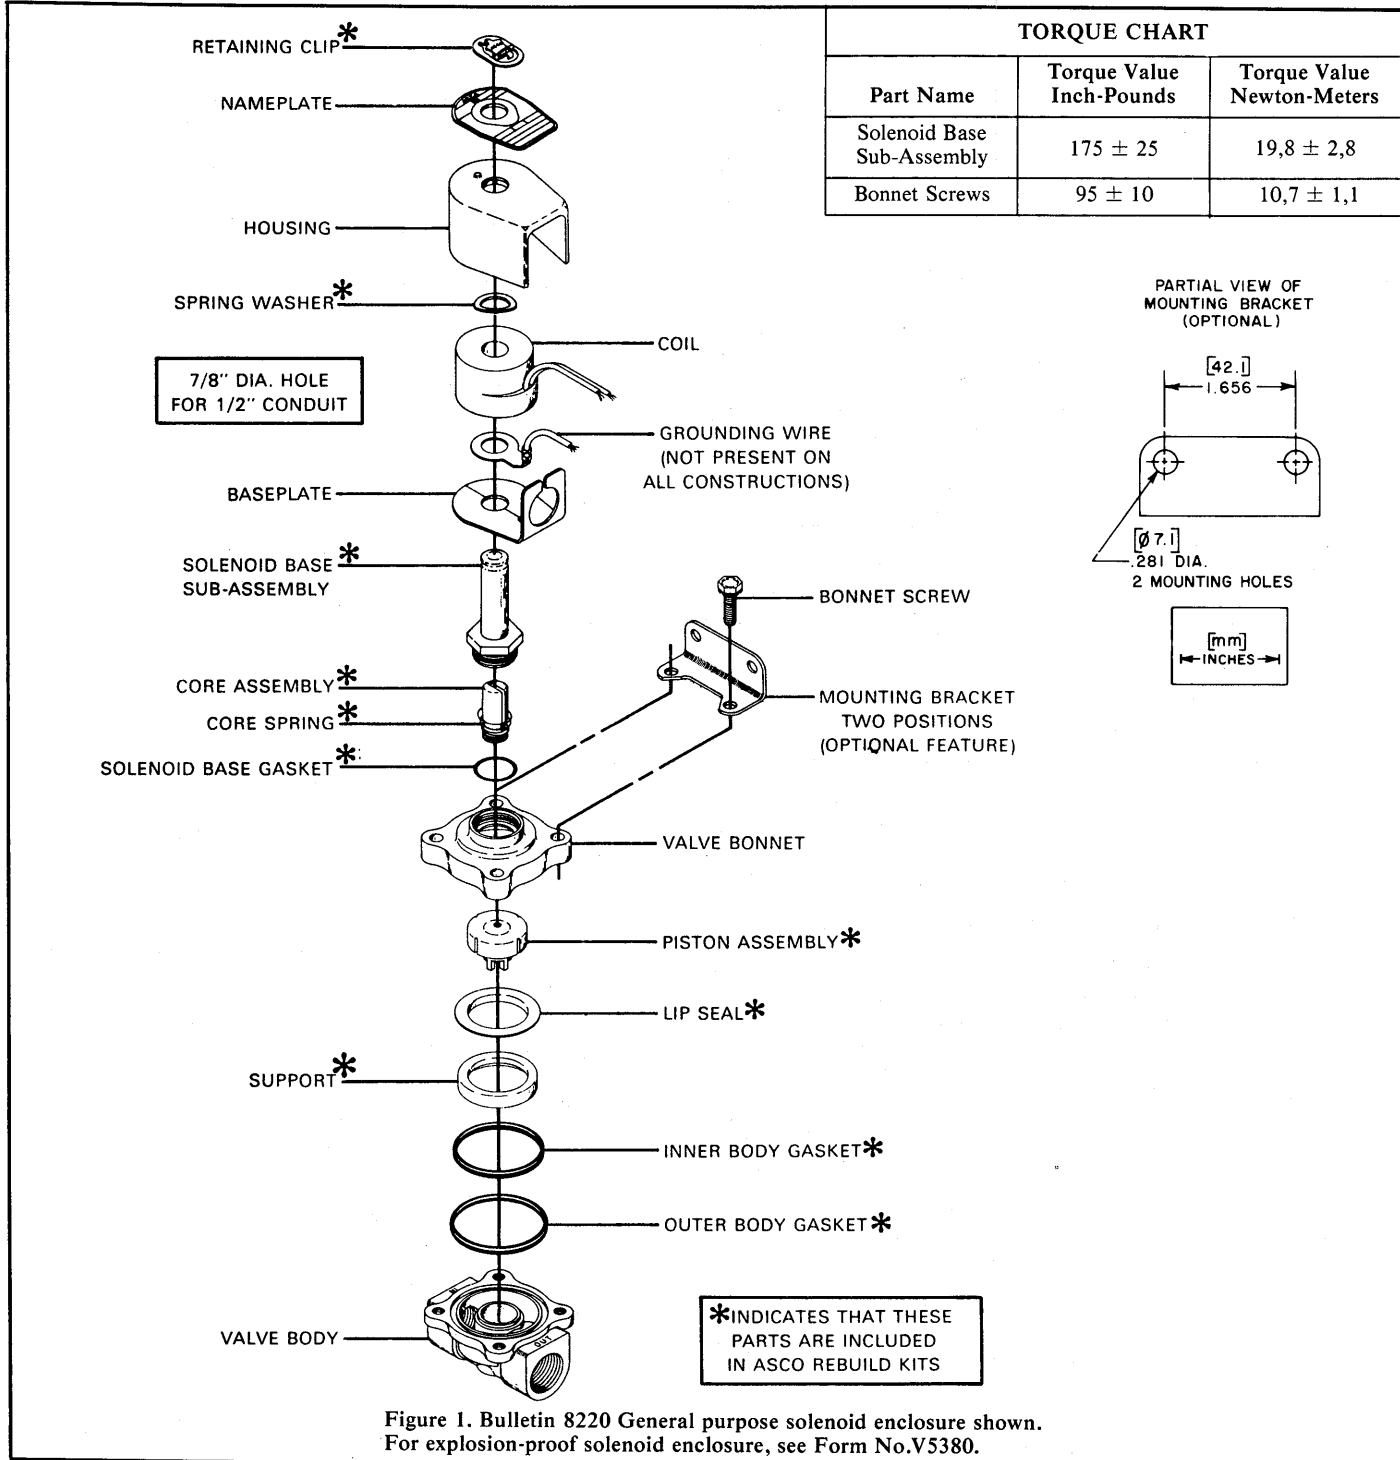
Bulletin 8220 General purpose solenoid enclosure shown. For explosion-proof solenoid enclosure, see Form No.V5380.
